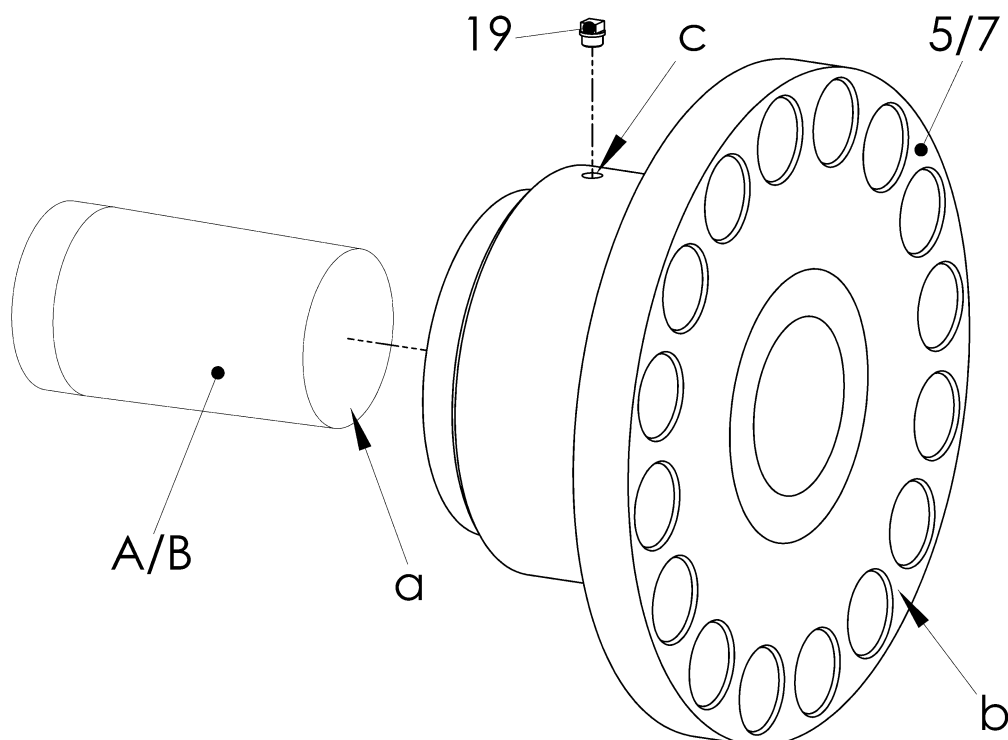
Mounting the hub (5/7) with conical oil interference fit
